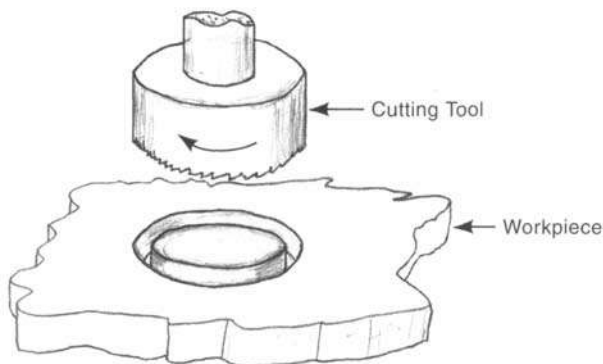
B7 Trepanning. In this example, a hole saw type of milling cutter is being used.
